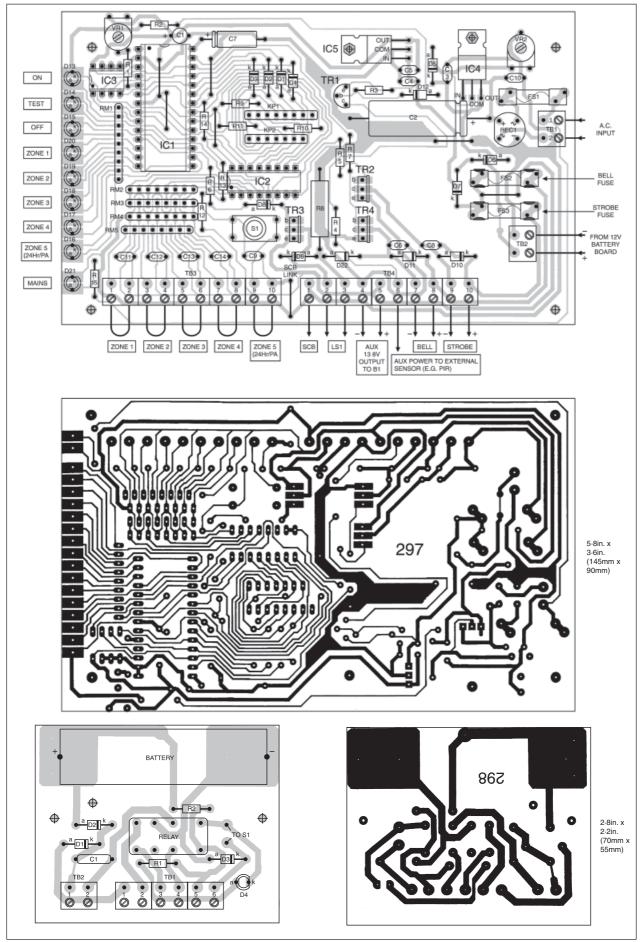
and Fig.6. Printed circuit board component layouts and full-size foil master track patterns.
